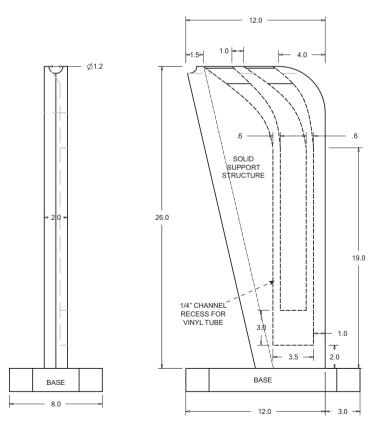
B6 Pitot tube experimental test fixture. Dimensions in *cm* are non-critical.
